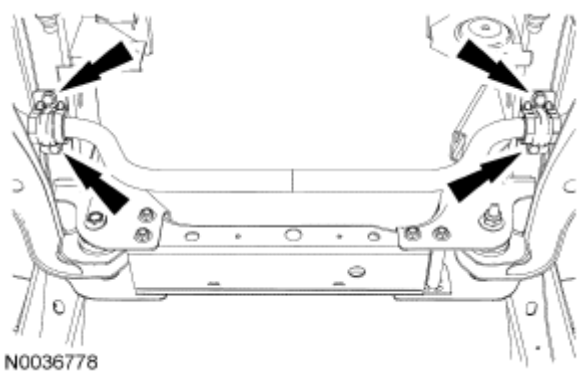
Locating Bolts And Stabilizer Bar Brackets
